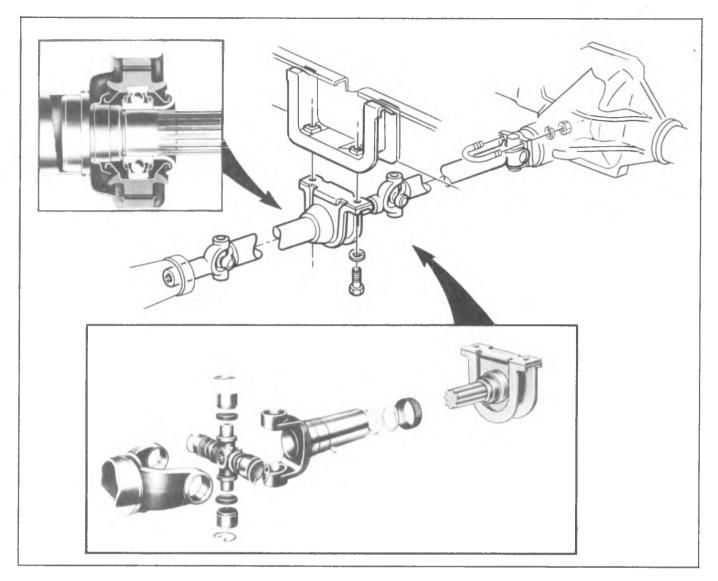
A-18--Propeller Shaft, Universal Joint and Bearing Support
